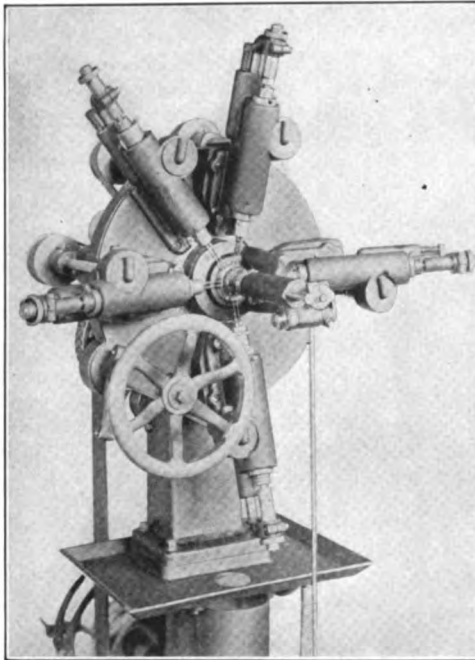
A 10-SPINDLE DRILLING MACHINE
